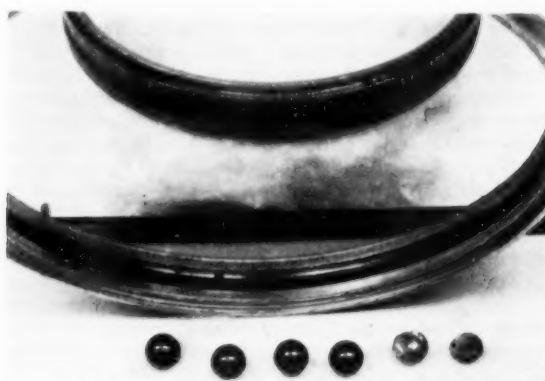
DAMAGED HUP DRIVE-SHAFT BEARING
